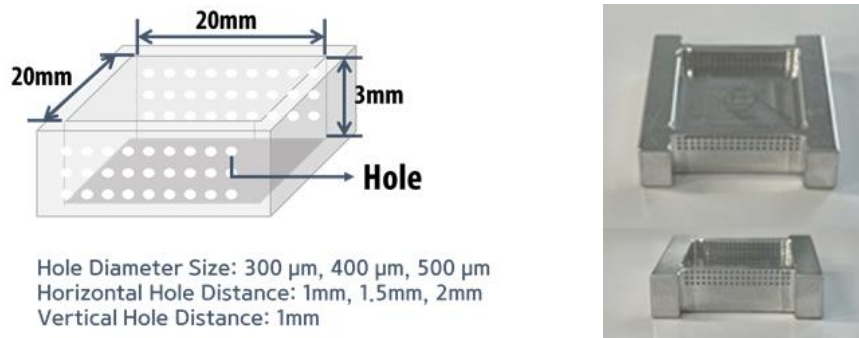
Images of the fabricated mold (ex. 500 μm hole size, 1 mm distance).
